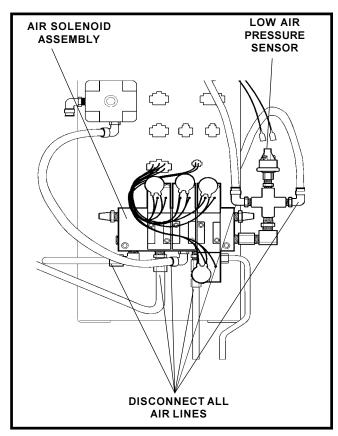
Tool release piston assembly with air solenoid assembly.
